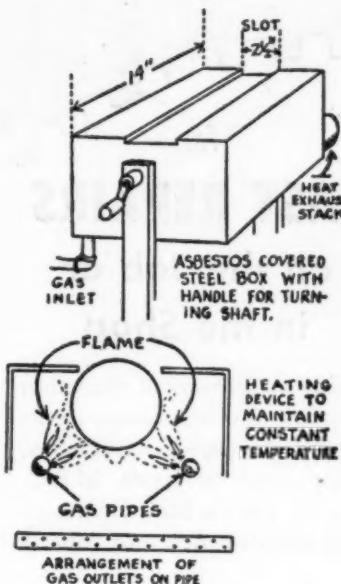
How to hard-face a preheated shaft with acetylene welding after removal from furnace. Temperature to be held at 1500° throughout operation by setting shaft in a revolving cradle over flame source within a metal box as sketched. The welding operation is performed on the horizontally-held shaft through a slot in the top of the box
